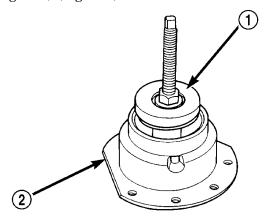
Remove Differential Bearing Cone (Ring Gear Side)
